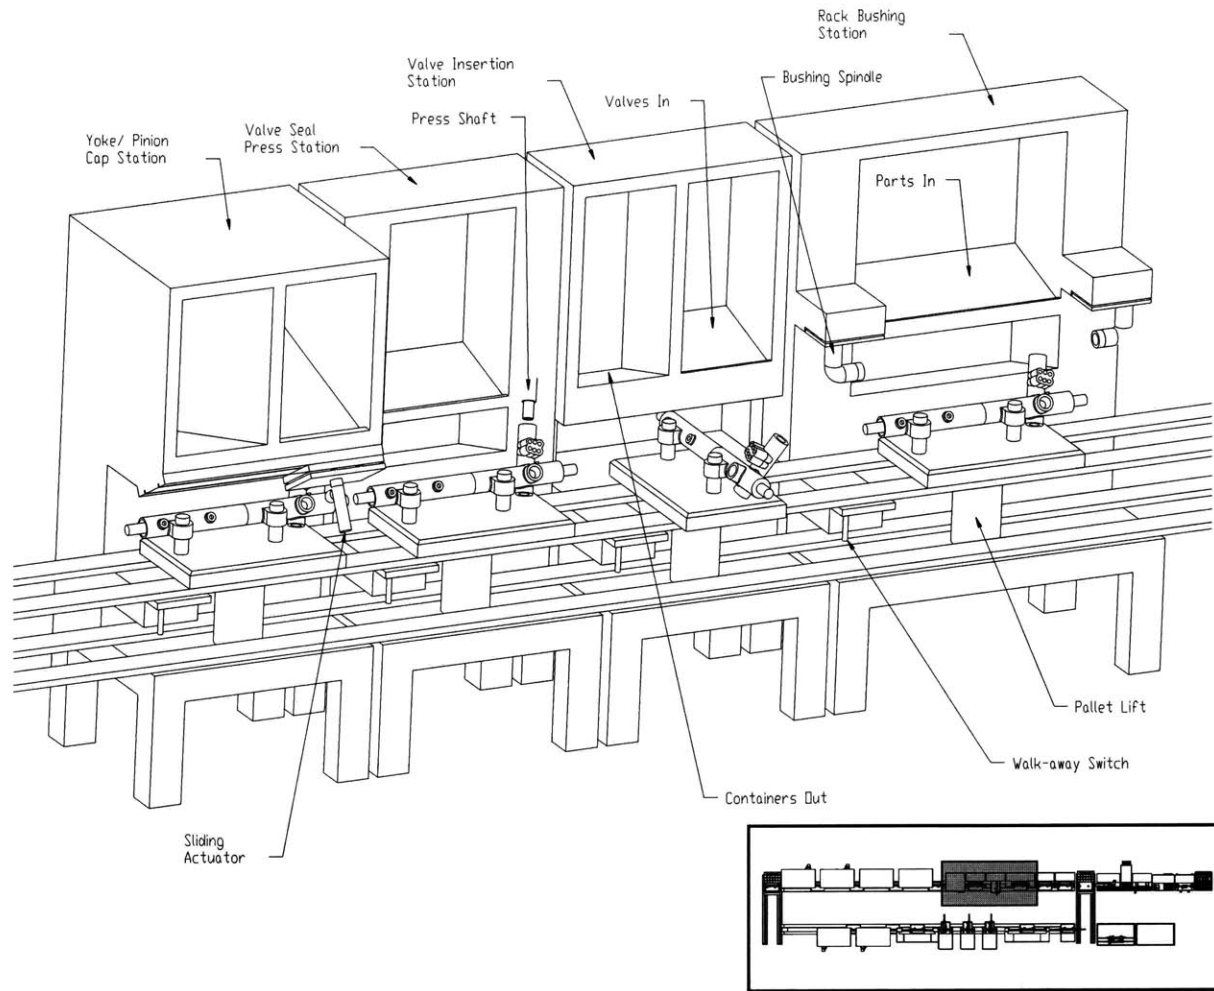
Detail View of Stations from the U-222 Assembly Cell
